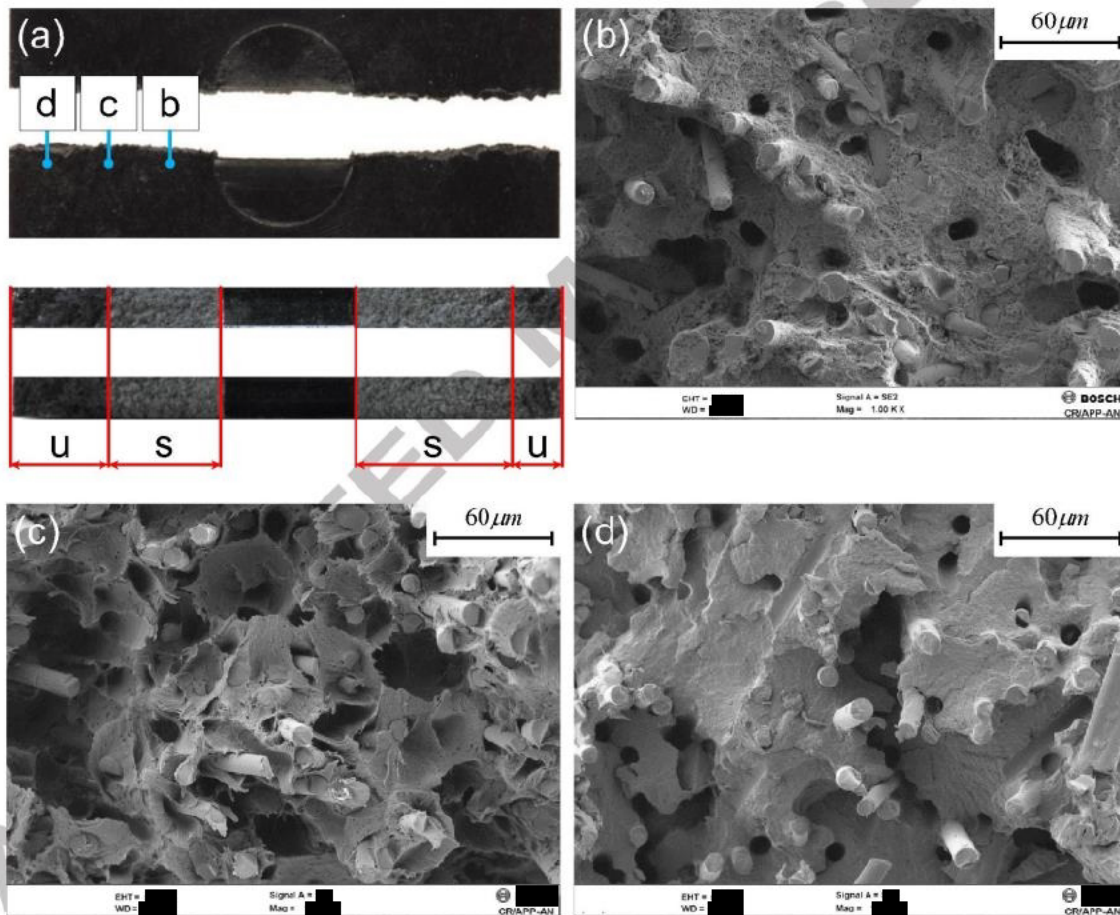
Fracture surface morphology of a notched specimen; (a) Failed specimen; “s” and “u” indicate the fracture surface caused by stable and unstable FCP respectively; (b) Fracture surface at crack initiation; (c) Fracture surface at the end of the stable FCP; (d) Fracture surface caused by unstable FCP.
